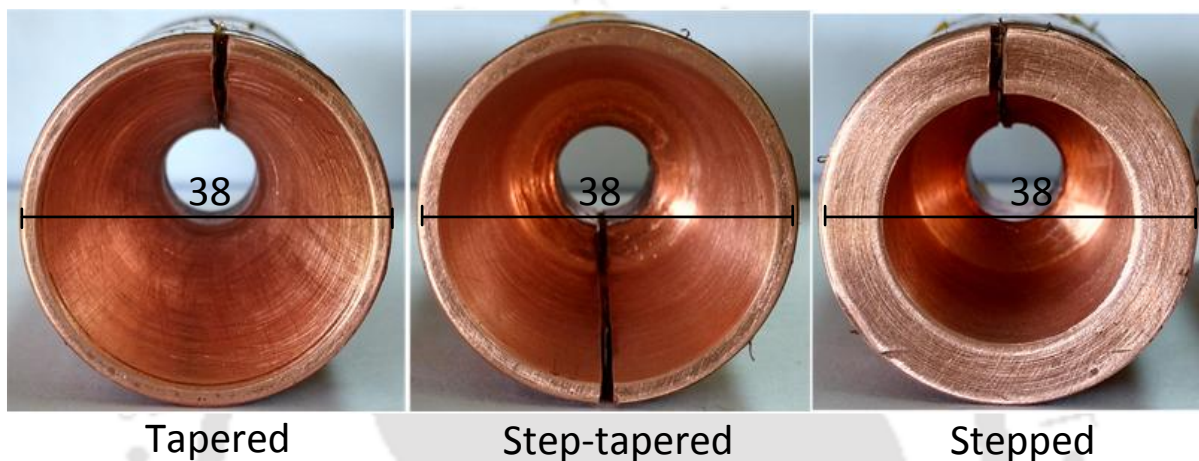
Cross-section of the tapered, step-tapered and stepped types of field shaper
